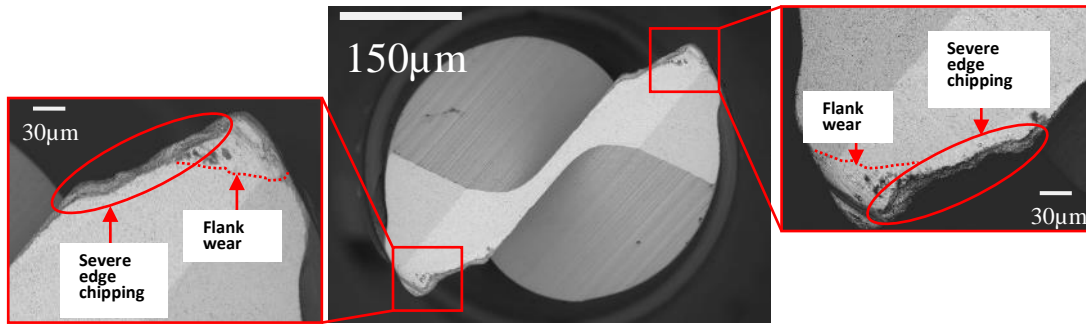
Top view of worn endmill obtained at Tool #4 (cutting speed of 62.8m/min, feed per tooth of 0.75 μm and depth of cut of 100 μm)
